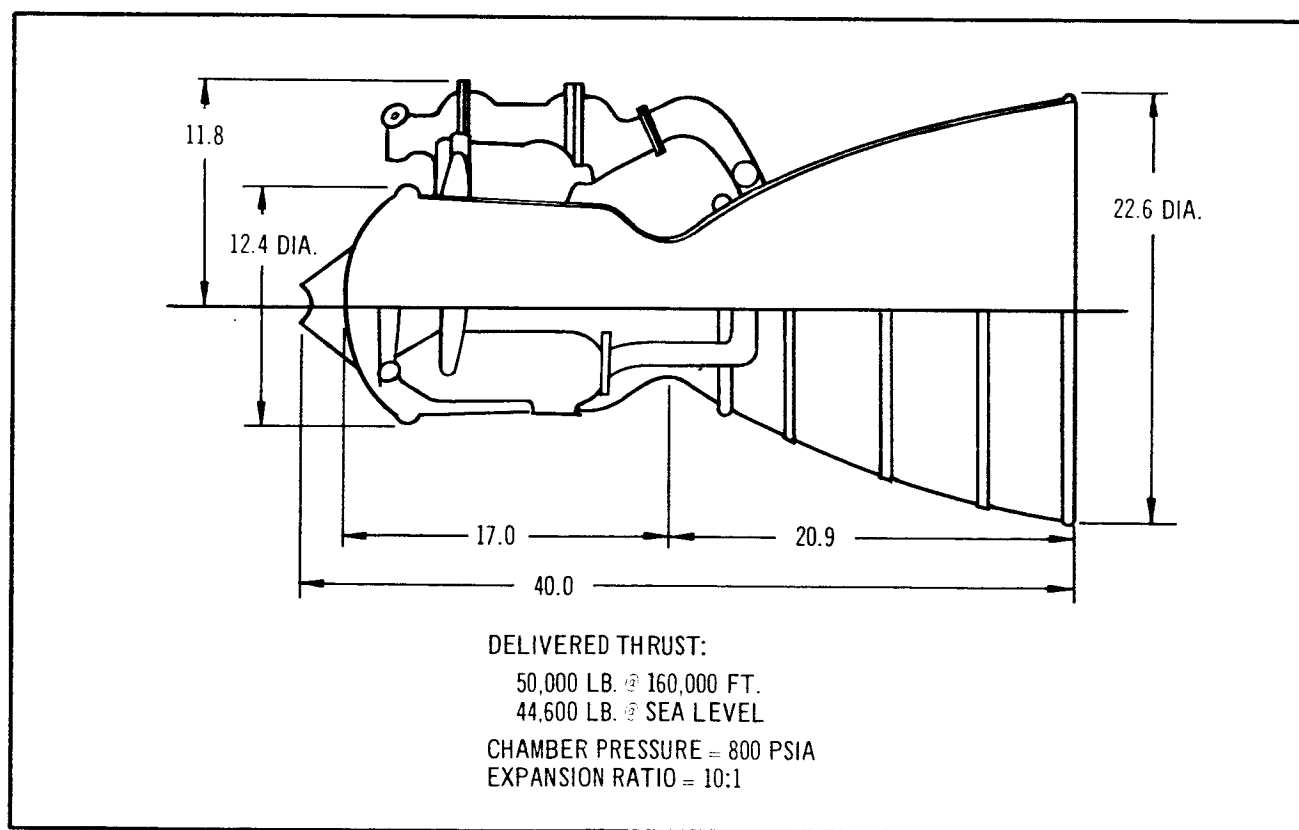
HES-2G Steering and Maneuver Rocket Engine
